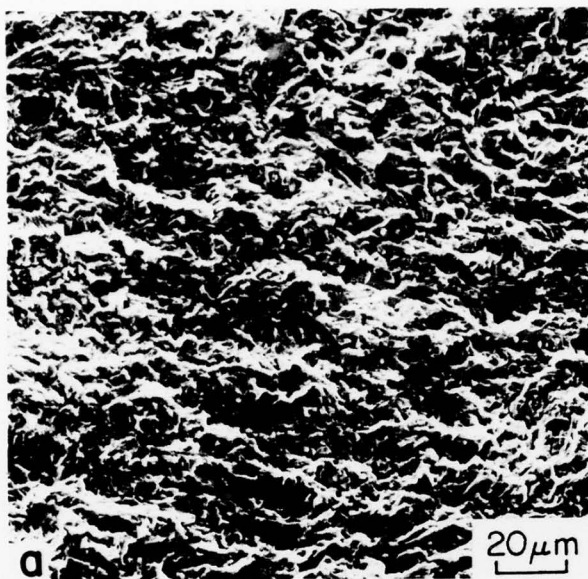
Fracture surface of Condition 8 tested at  $R = 0.3$  in dry air.
